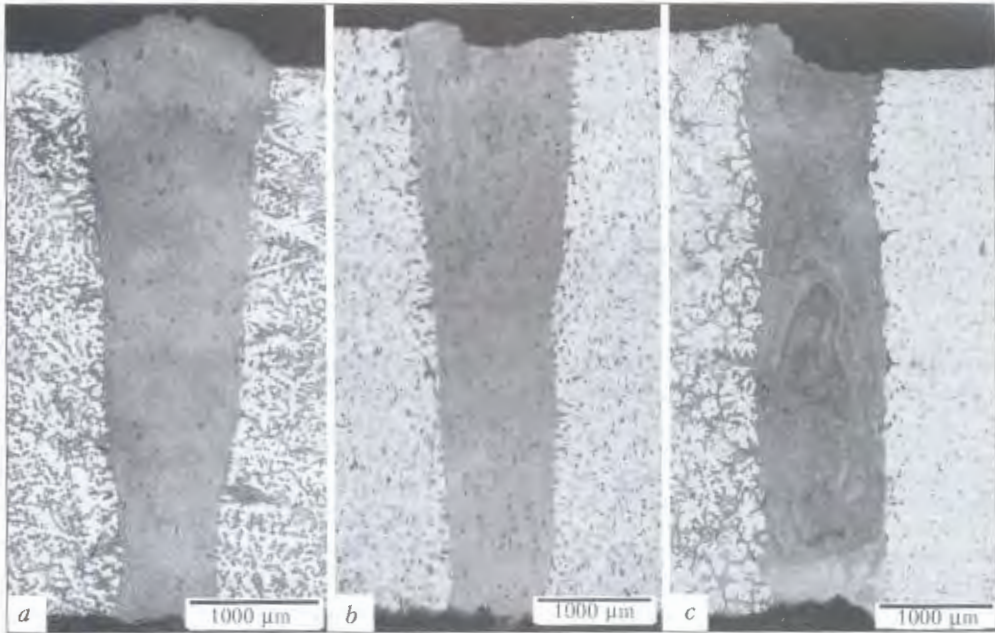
Macrosections of butt-welded joints of similar and dissimilar alloys: *a* – AZ91-AZ91; *b* – AM50-AM50; *c* – AZ91-AM50
